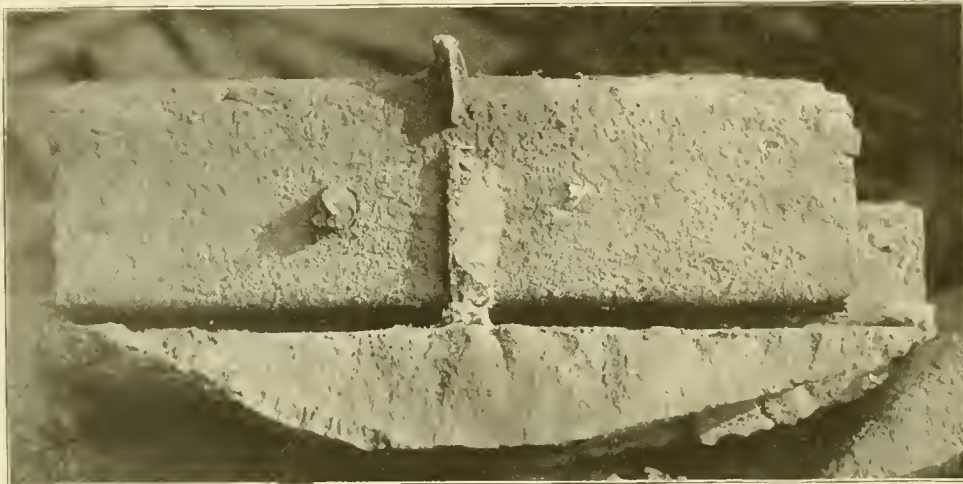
BROKEN "CAST-WELD JOINT" AS REMOVED FROM TRACK.
